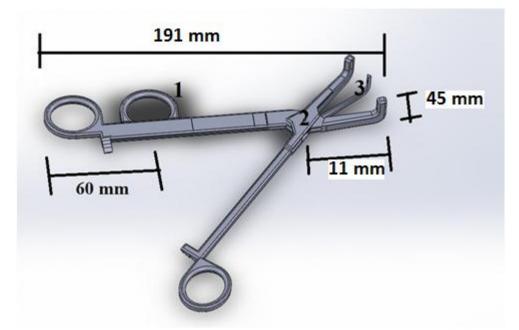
Trigger Scissors design. The numbered components shown are 1) trigger, 2) hinge, and 3) cutting blades. Dimensions shown are approximate and were refined for the final prototype design (see Prototype Construction section below).
